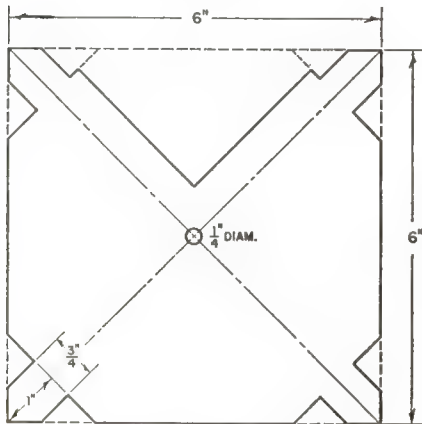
Dimensions of the aluminum plate that supports the angle pieces. The large V notch should not be cut until the angle pieces are in place.
